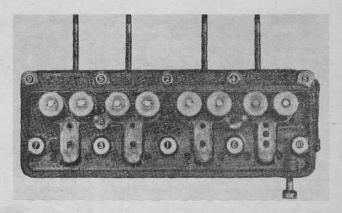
The sequence in which the cylinder head holding-down nuts should be tightened.
